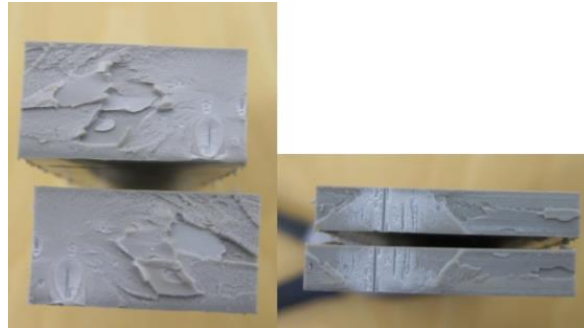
Fractured PP Samples (cross-sectional view) [29]
